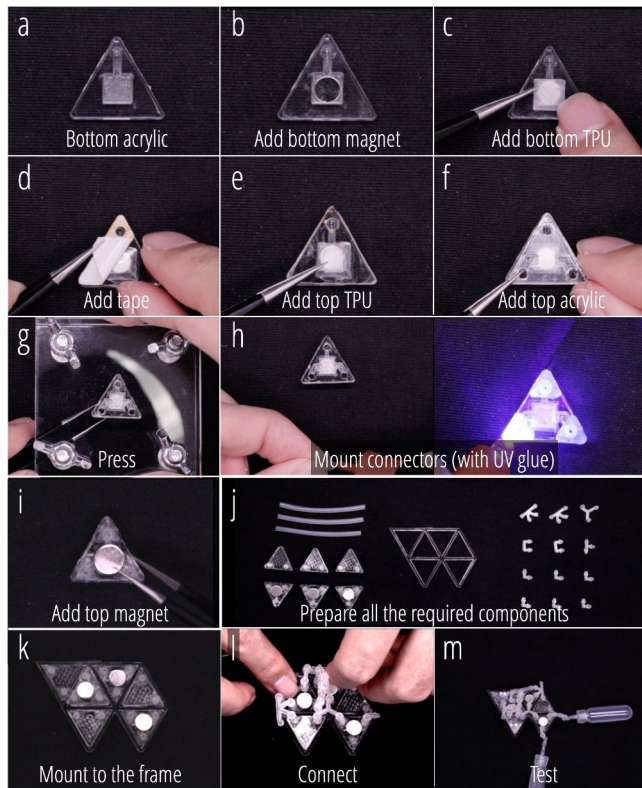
Components assembly and wiring process. (a-i) Assembling a switch. (j-m) Assembling an operator through wiring components.
